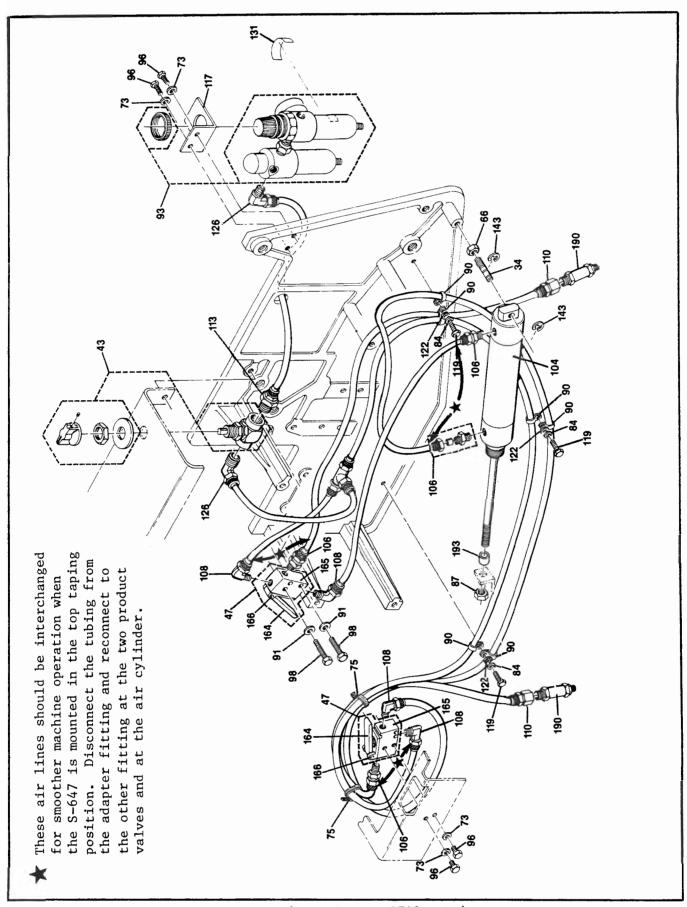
B - PNEUMATIC COMPONENTS (Serial Nos. 1700 & Up) Refer to page 24 for Pneumatic Components Parts List.
